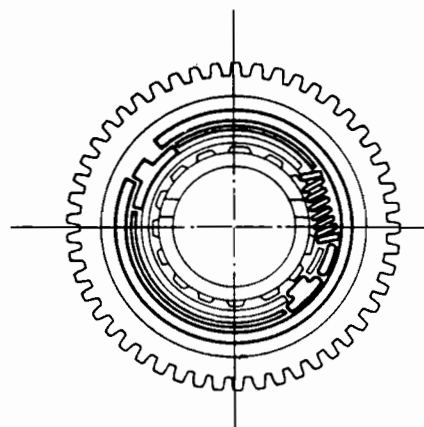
1st/2nd synchro unit correctly assembled (Sec 8)
